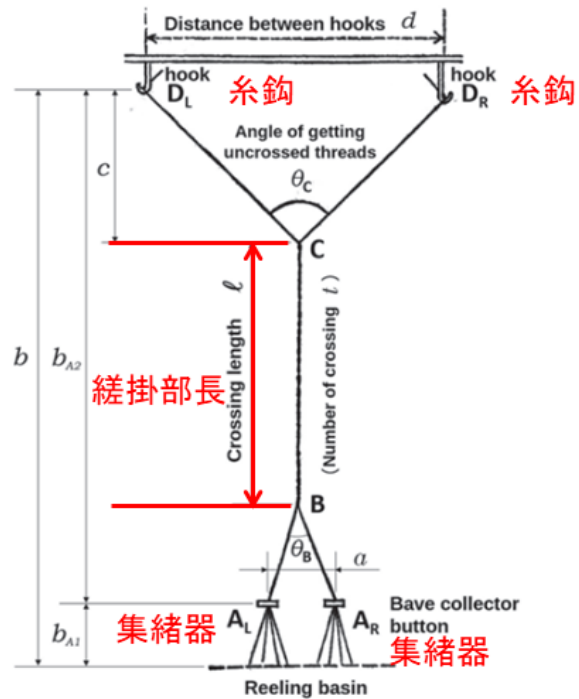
Fundamental structure and geometrical parameters of French type silk-reeling machine.
